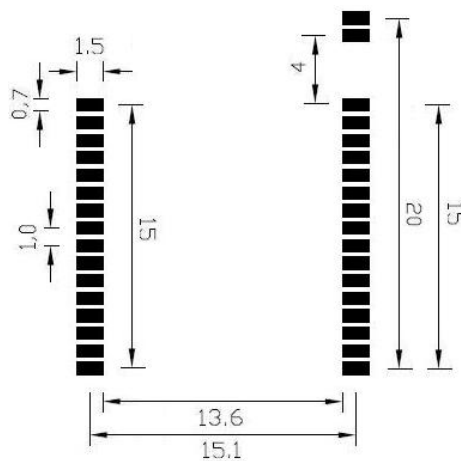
HPZB01P-UO module Recommended PCB footprint, Top View
